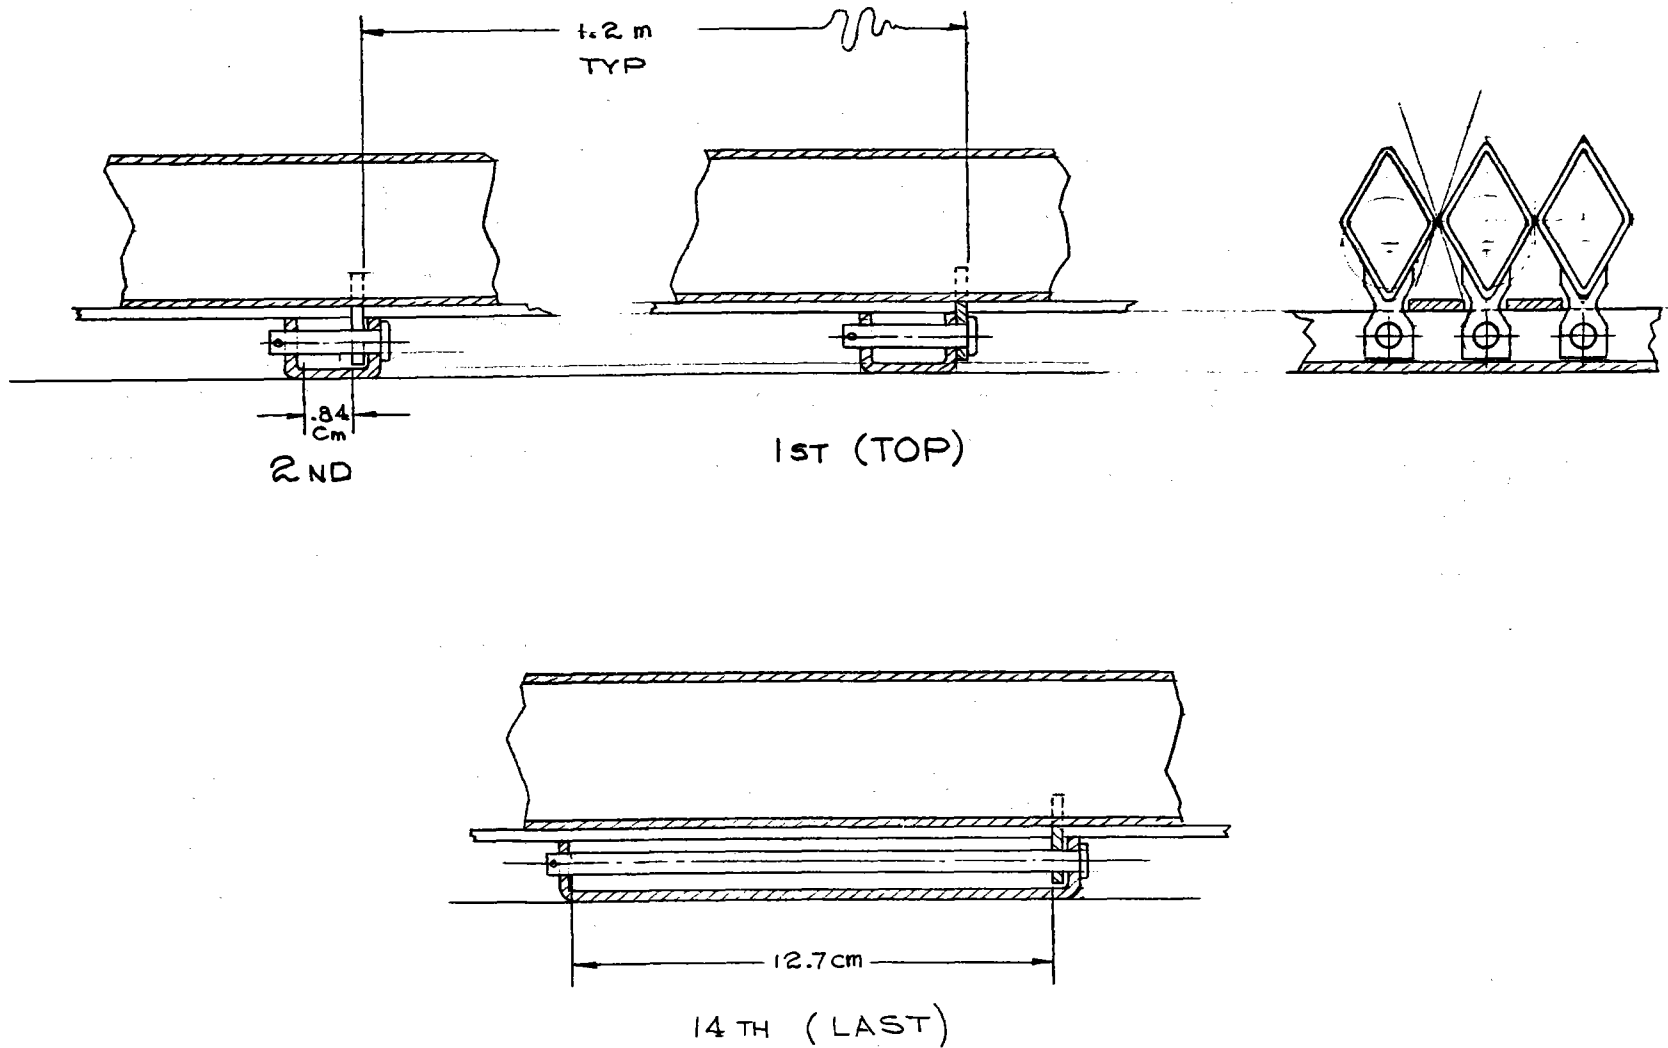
Receiver Panel Concept Showing Formed Tube Pin Mounting Arrangement
